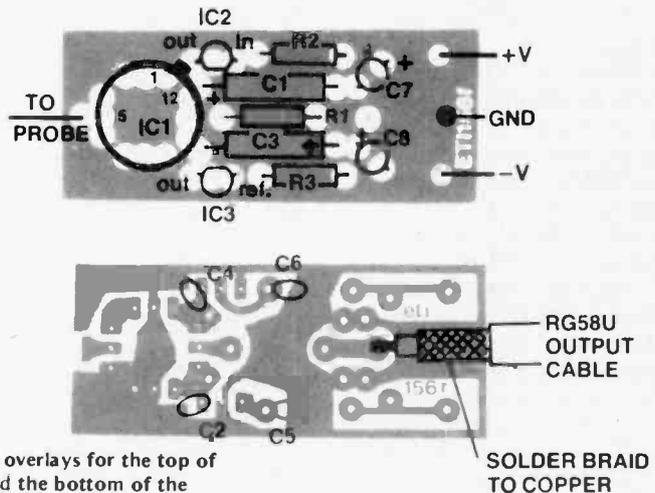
Component overlays for the top of the board (top) and the bottom of the board (bottom!).
